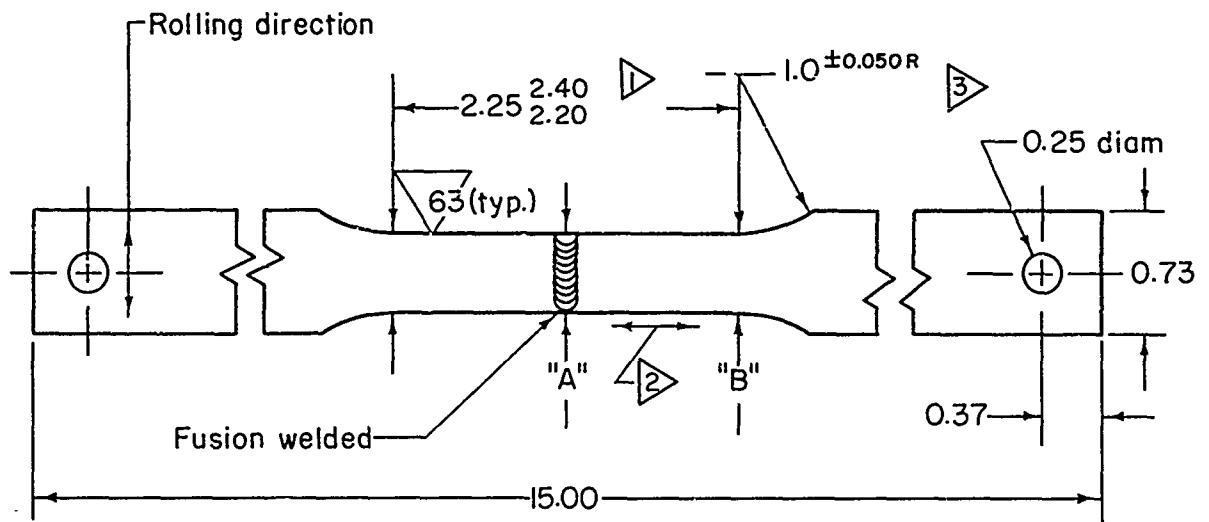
FUSION-WELDED SPECIMEN FOR ROOM-TEMPERATURE TENSILE TEST
